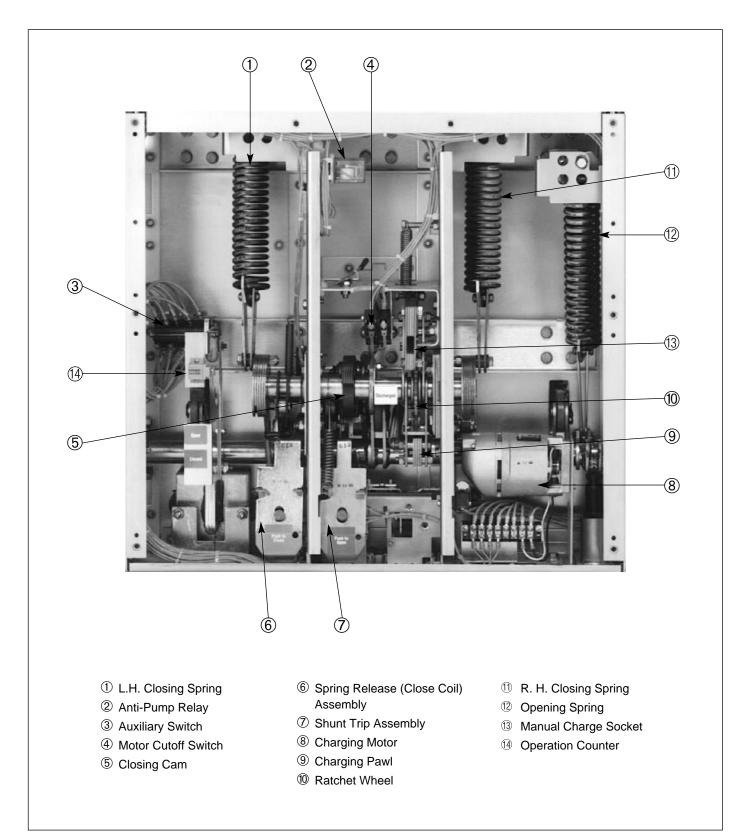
Typical VCP-W Vacuum Circuit Breaker Element with Front Cover Removed
